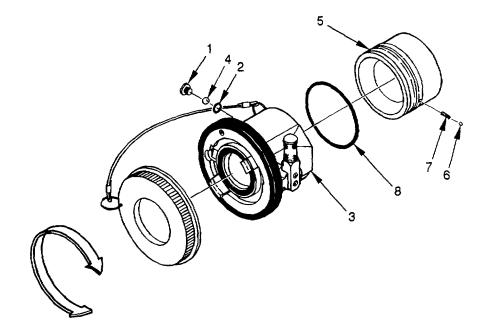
Flange Mounted Unisex Coupling Replacement
